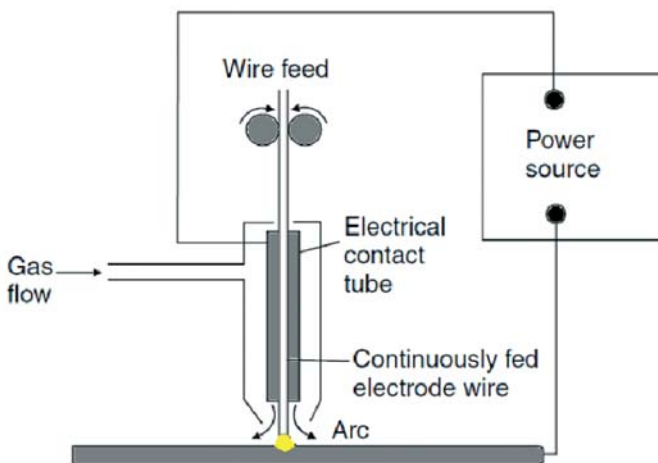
Metal Inert Gas Welding [1]
